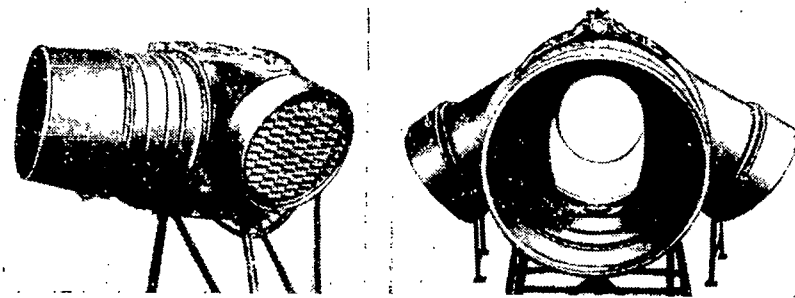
Deflector and Jet Nozzle of the Rolls-Royce "Spay" RB-163 Bypass Engine.
